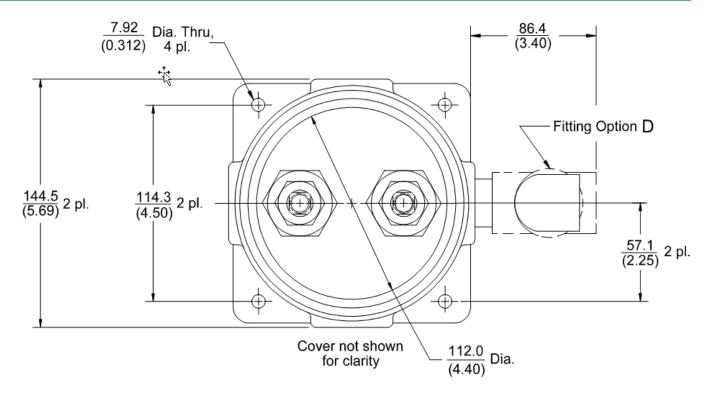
21022 Dual Axial Probe Housing Assembly Dimensions, Top View
